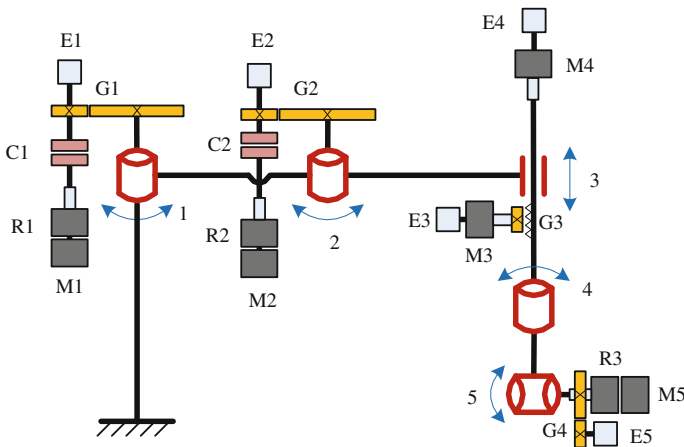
DOF configuration of the proposed new arc welding robot (*M1–M2* servo motors; *M3–M5* stepper motors; *C1–C2* electromagnetic clutches; *R1–R3* reducers; *G1, G2* and *G4* gear pairs; *G3* rack-and-pinion; *E1–E5* encoders; 1, 2, 4 and 5 revolute joints; 3 translational joint)
